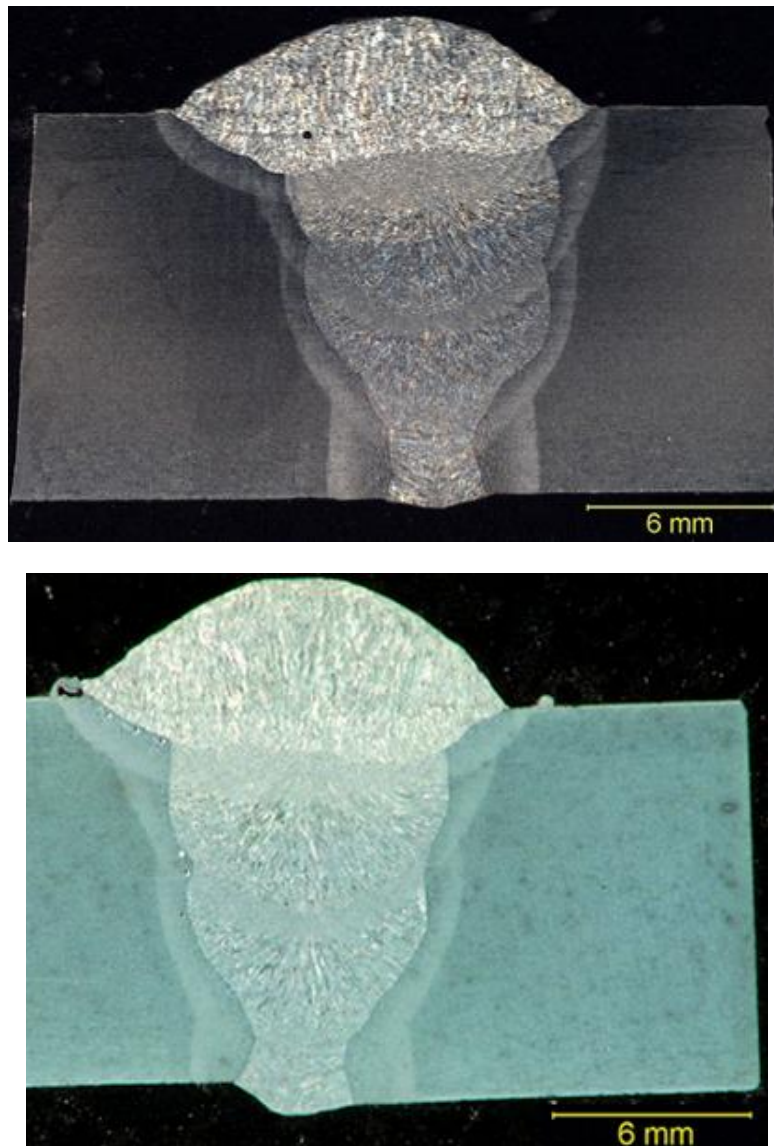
Girth weld macro of the low Y/T X65 pipe
